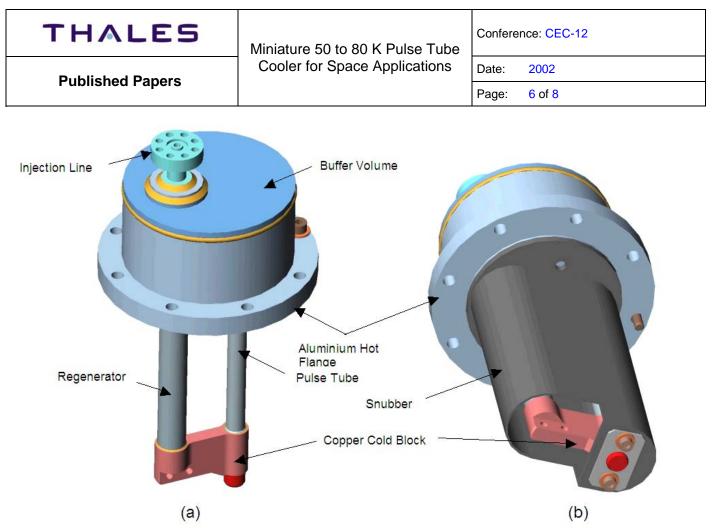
Preliminary design of the pulse tube cold finer Engineering Model. (a) without snubber. (b) with snubber.
